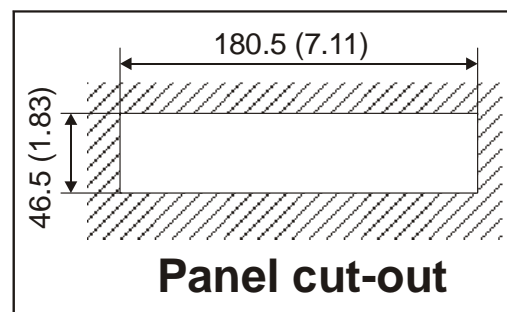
Panel Cut-Out Dimensions for User Interfaces
